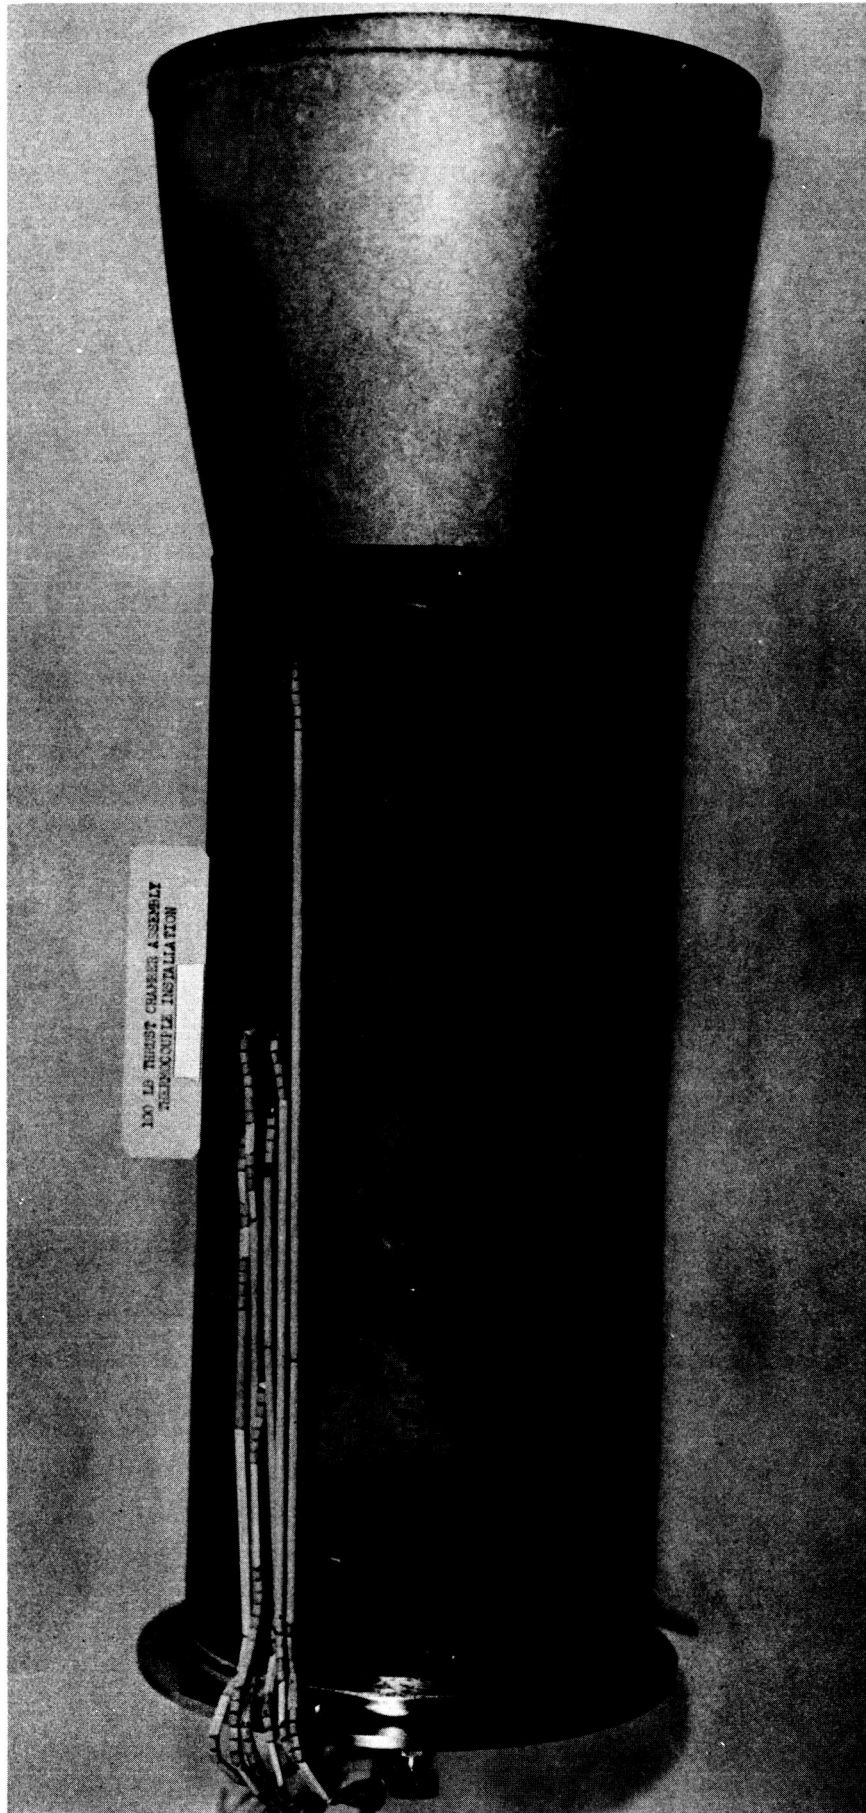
100-lb Thrust Chamber Assembly Thermocouple Installation
